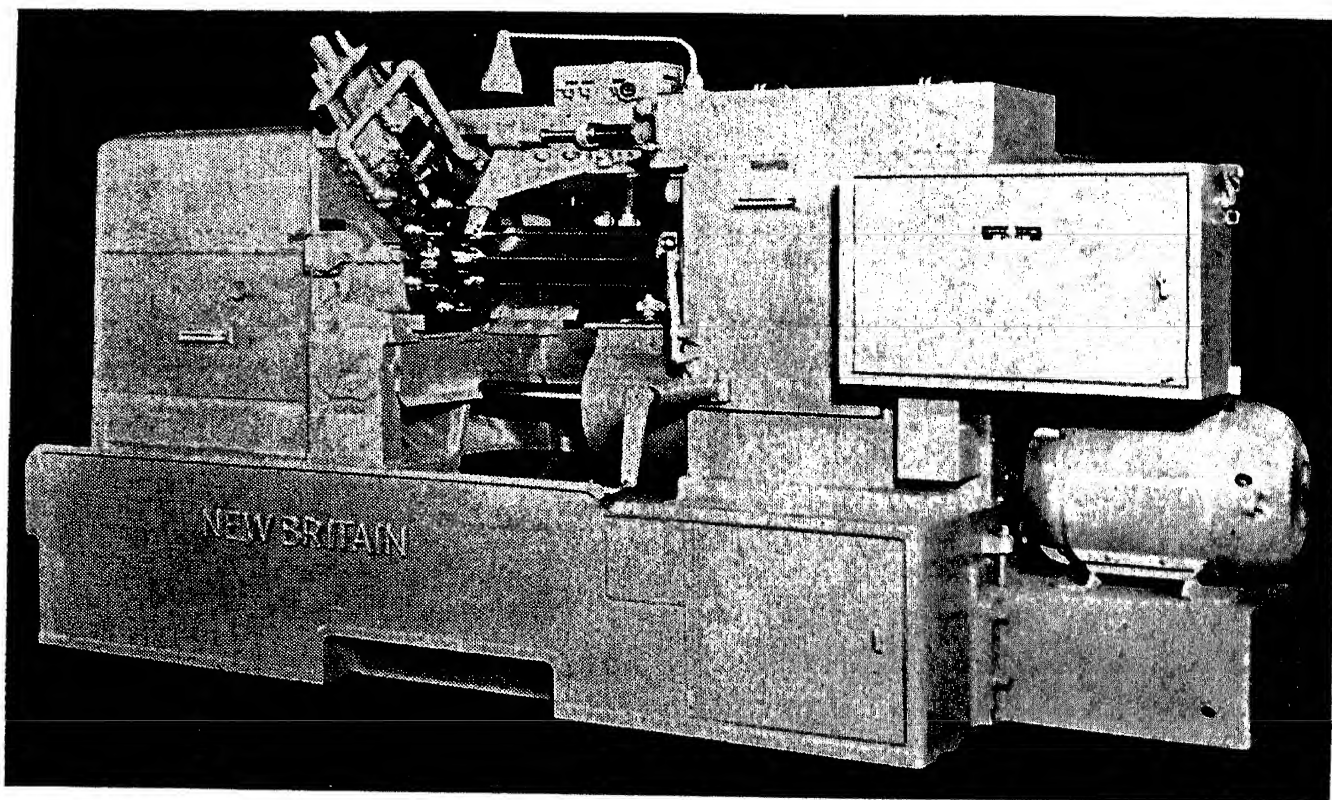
A six spindle automatic screw machine. (Courtesy New Britain Machine Co.)
